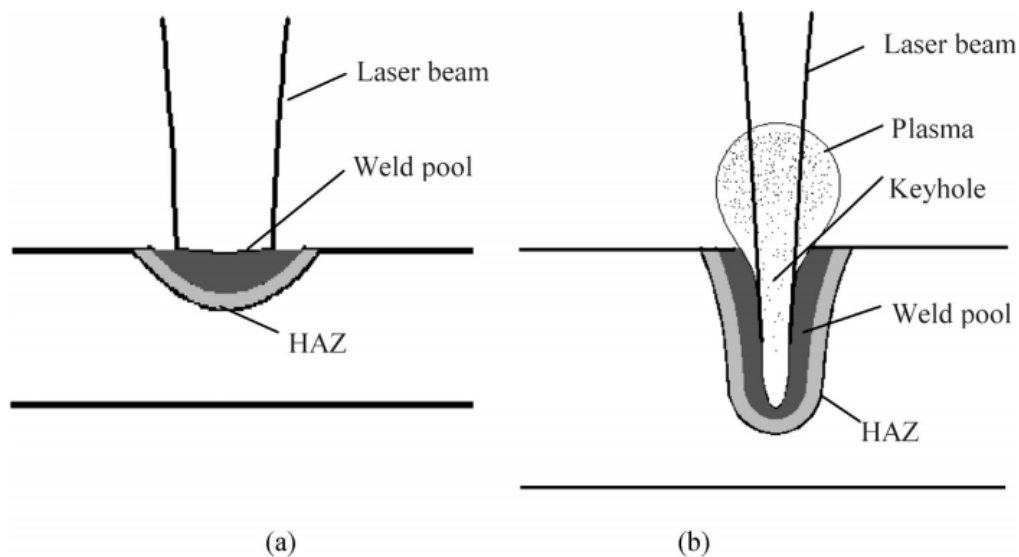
Modes of Welding (a) Conduction Laser Welding (b) Deep Penetration Laser Welding
